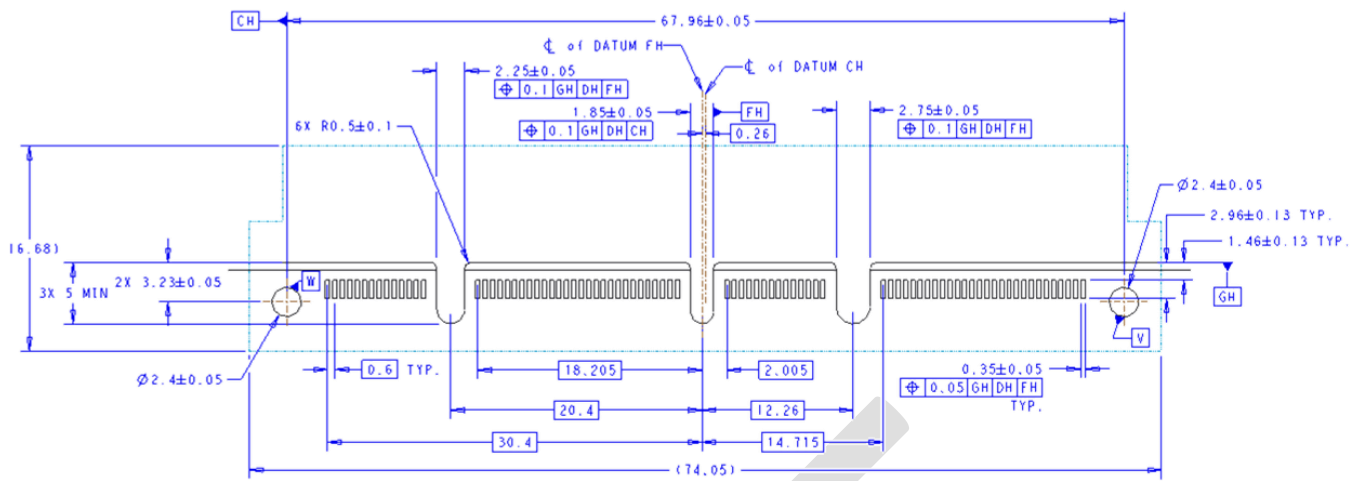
4C+ STRADDLE MOUNT CONNECTOR FOOTPRINT (MM)
